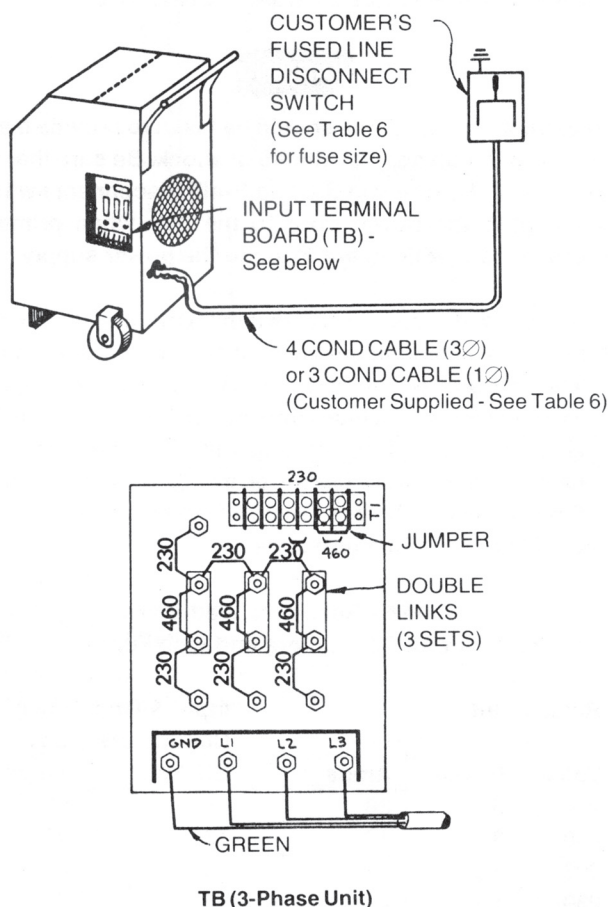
Input Power Cable Connection and Terminal Board (TB)
